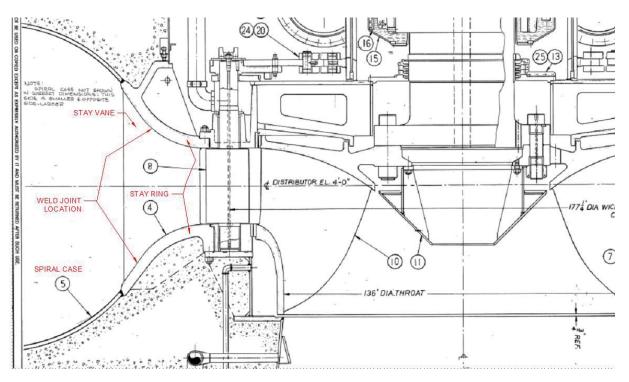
Stay Ring and Vanes, OEM Turbine Cross-Sectional View
